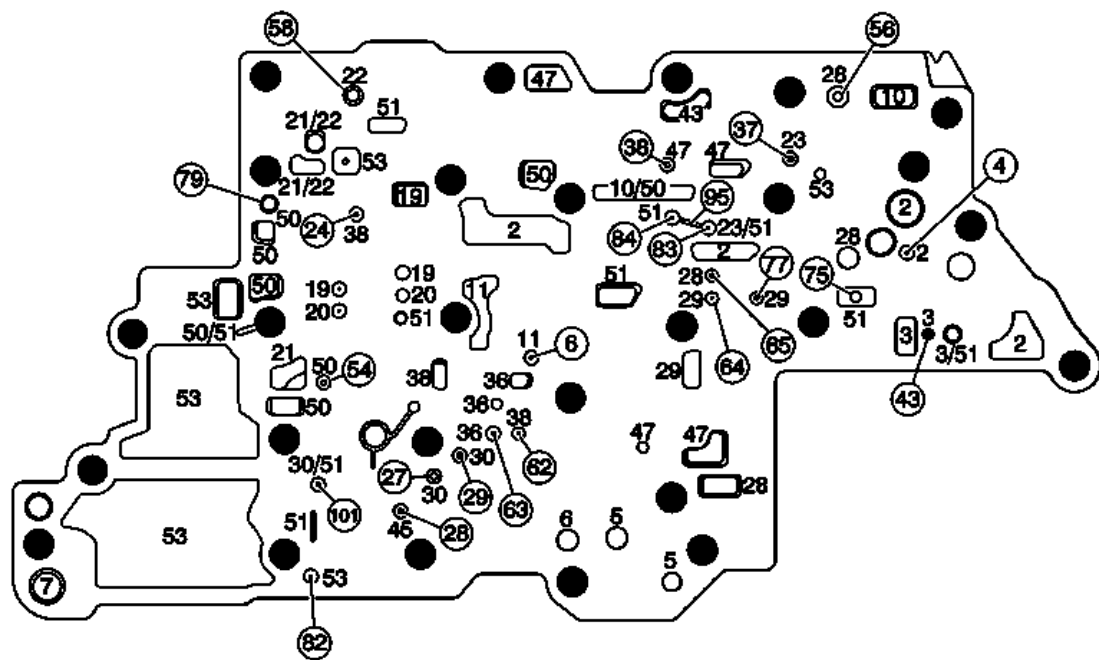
Control Valve Lower Body Spacer Plate Assembly
